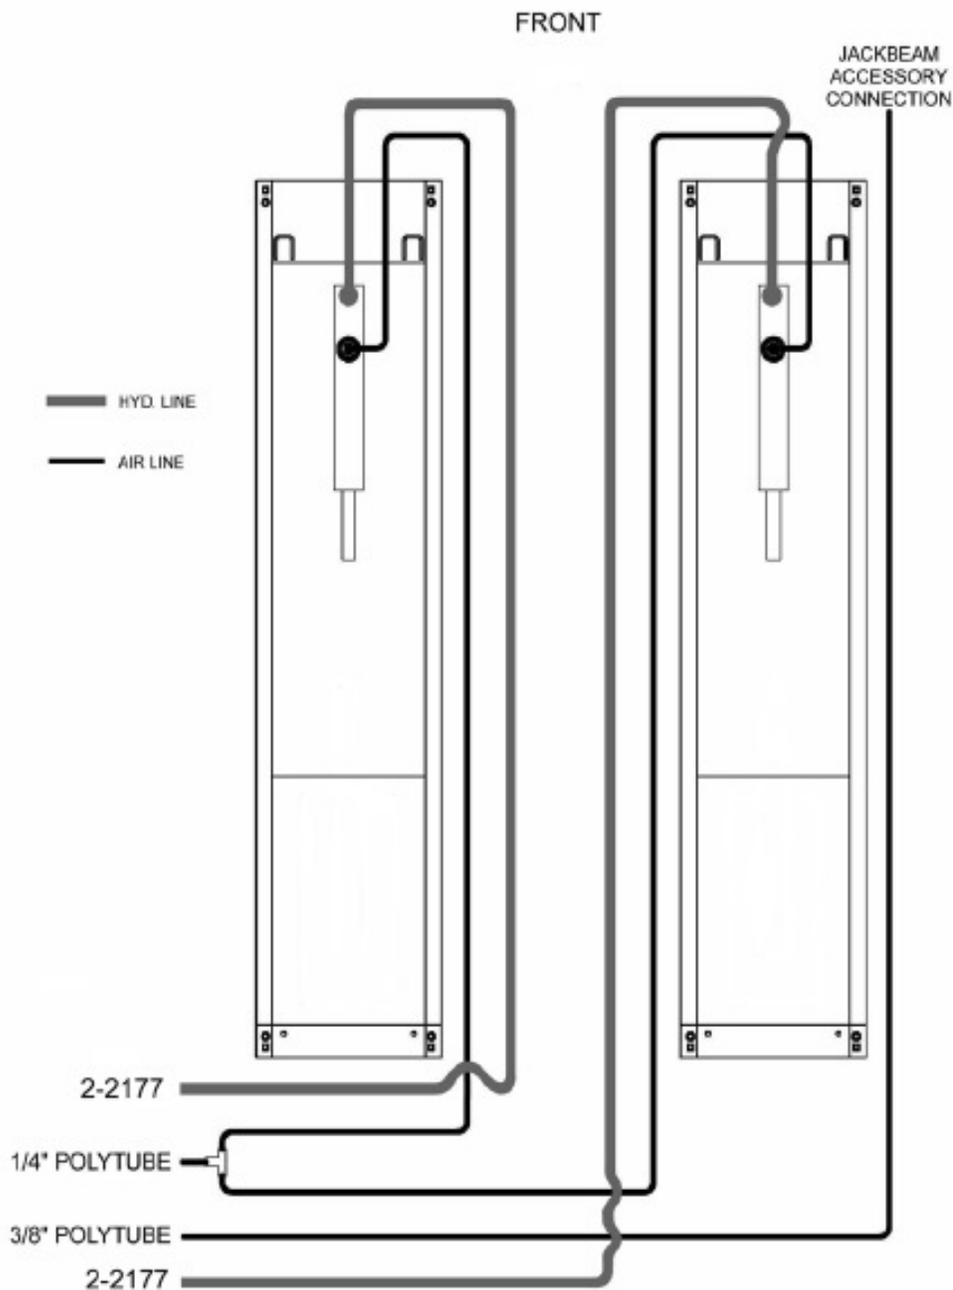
Air Safety, Auxiliary Air and Hydraulic Connections
